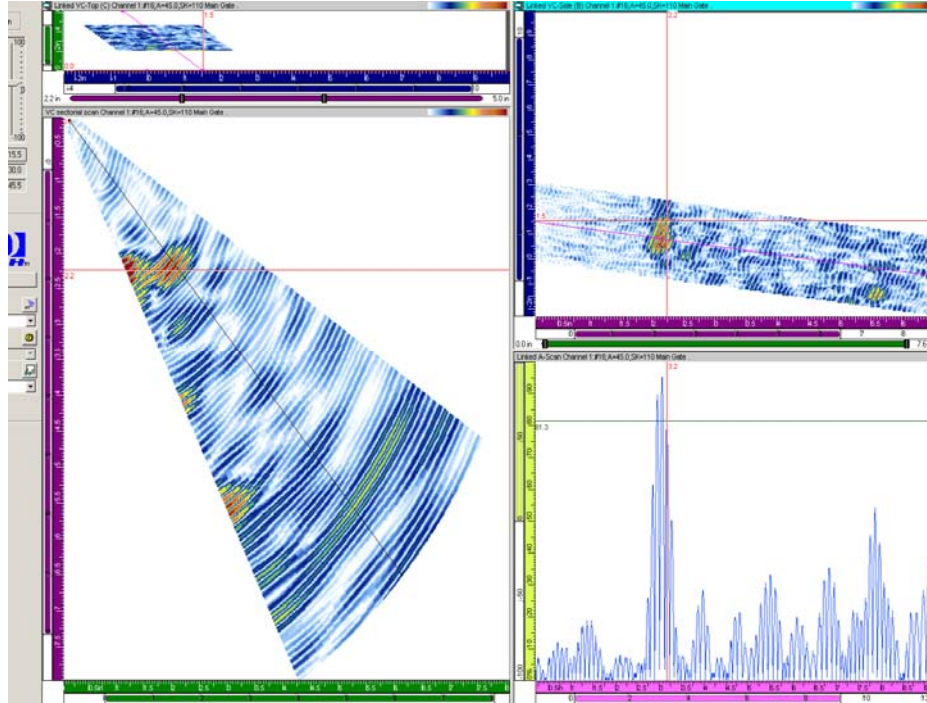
B511 as Inspected from the Equiaxed Side. This is blank material, i.e., no crack.
